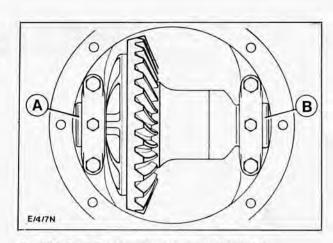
A – Adjusting nut – crown wheel rear side B – Adjusting nut – crown wheel front side
